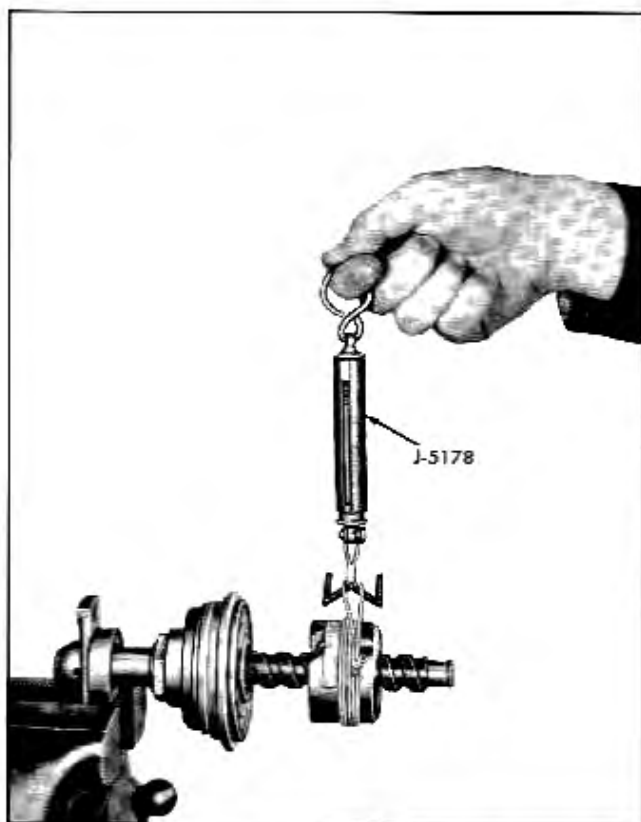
Measuring Preload of Ball Nut Using Spring Scale J-5178
